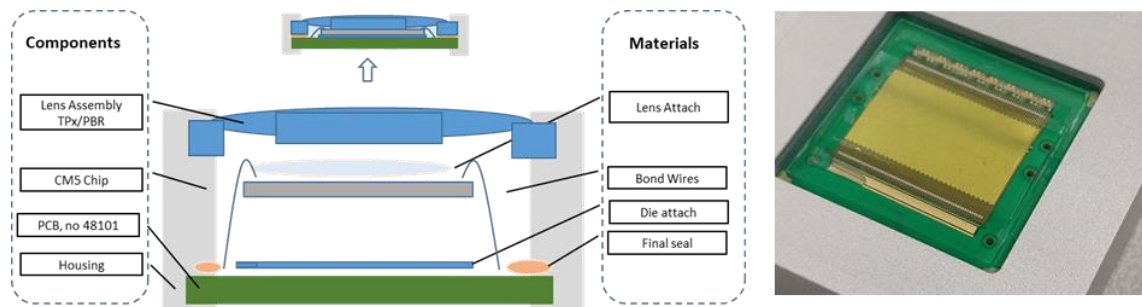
version C: schematic assembly flow of the acoustic stack. Right: CMUT CM5 device assembled on PCB within metal housing.
